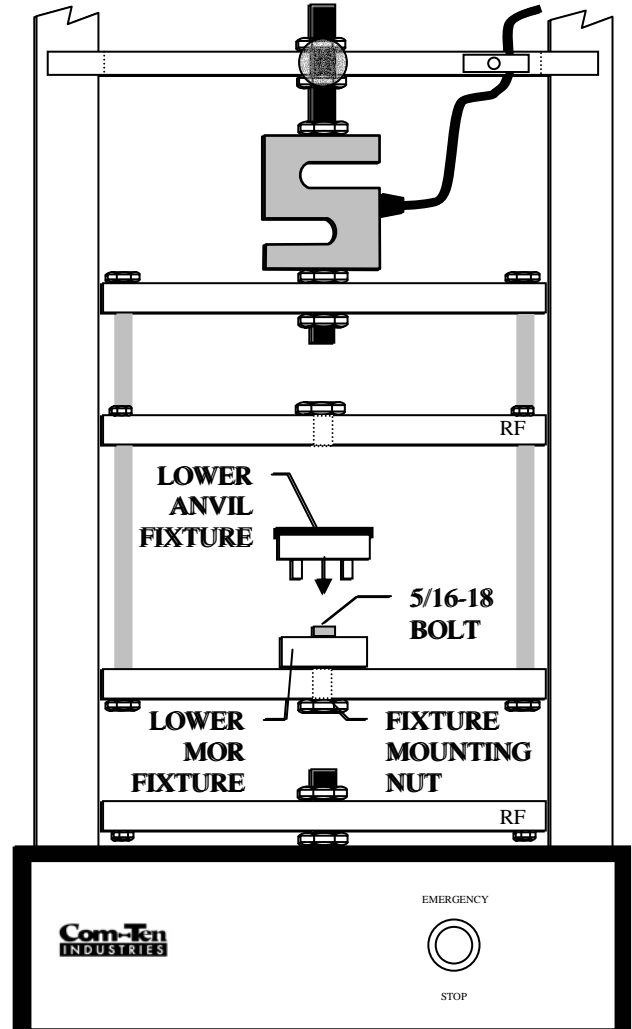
MOUNTING LOWER MOR FIXTURE
